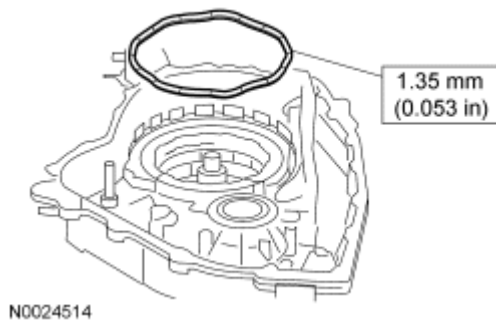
Identifying Thick, 10-Wave Low/Reverse Clutch Wave Spring
